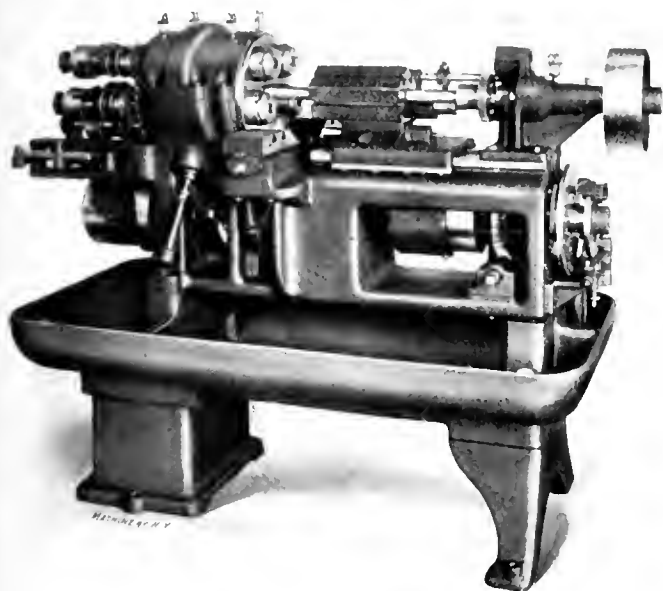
The Peerless Automatic Multiple-spindle Screw Machine.
